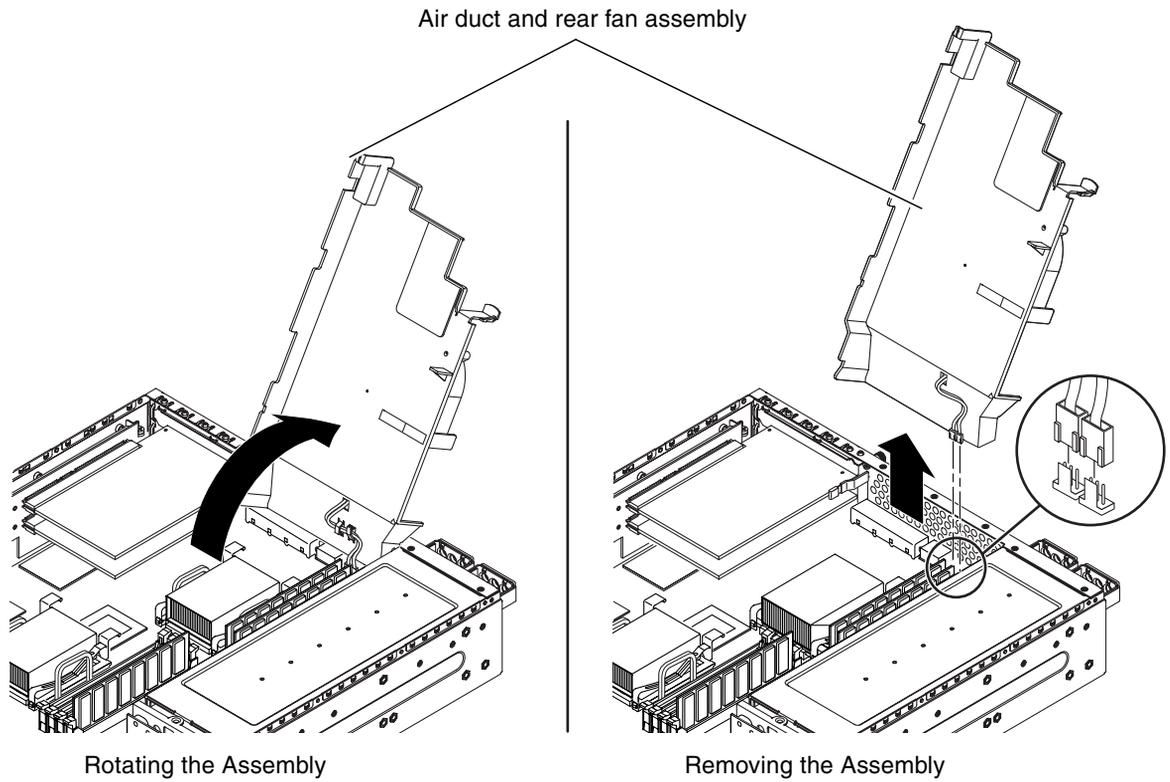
Removing/Rotating the Air Duct and Rear Fan Assembly
